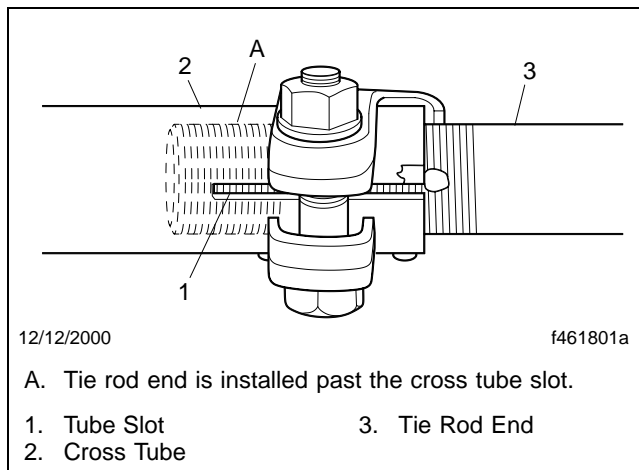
, Bottom View of Tie Rod End and Cross Tube
